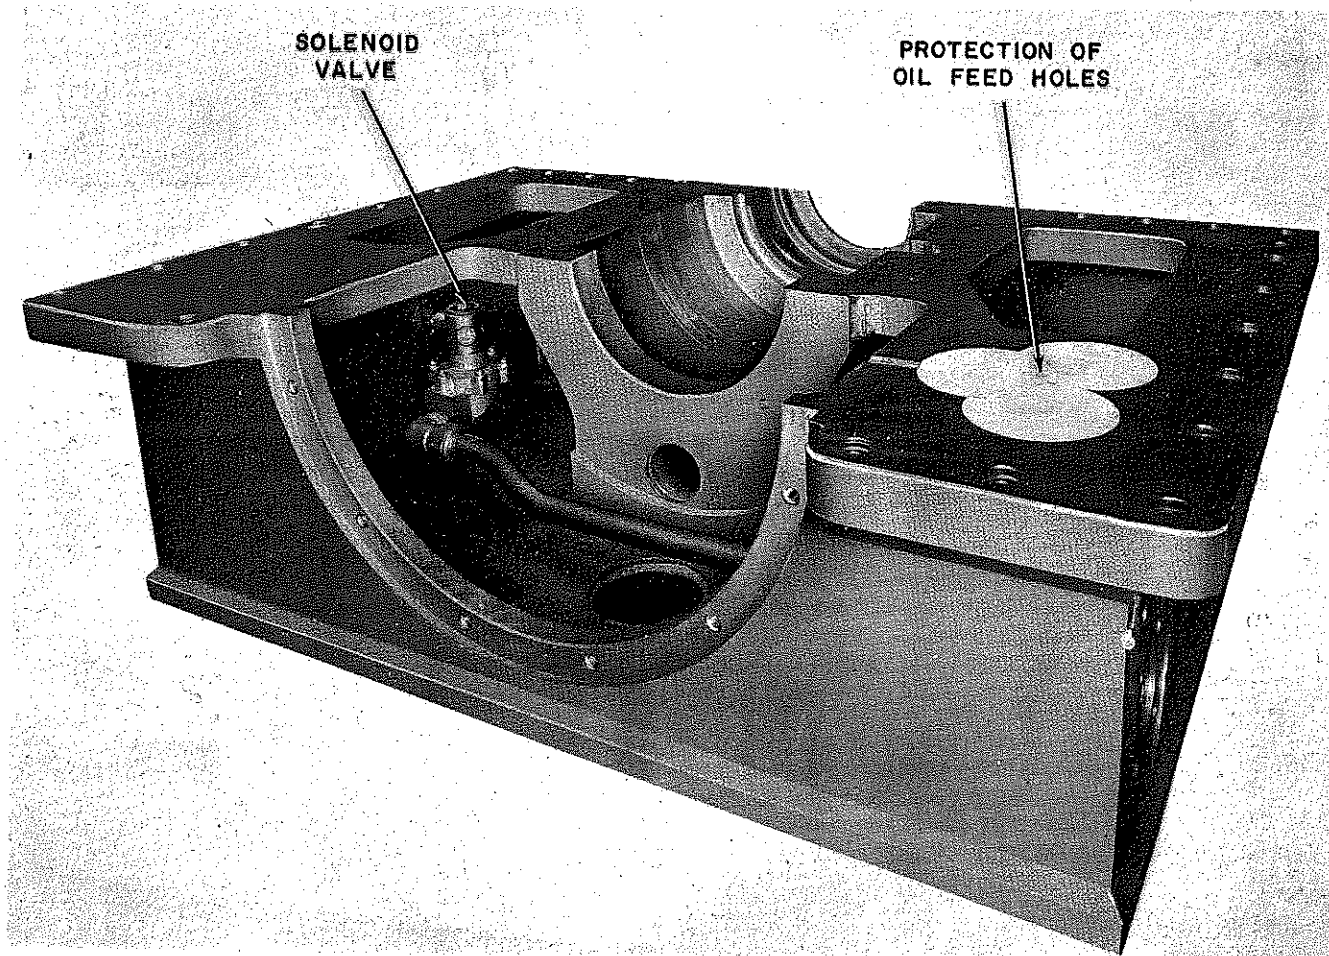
Solenoid valve for low bearing-oil-pressure protection
